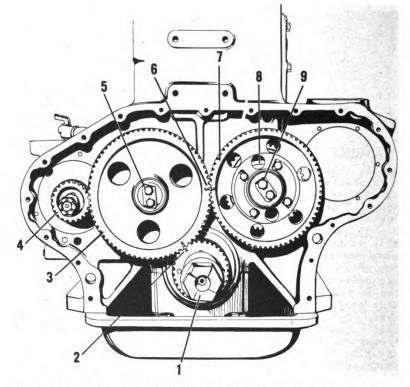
FRONT END SHOWING GEAR LAYOUT
